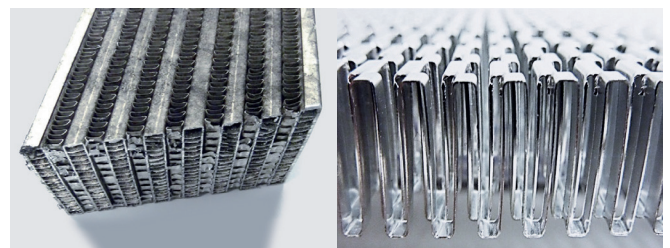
Section through a charge air cooler and structure of the turbulator inserts in the flat tubes
